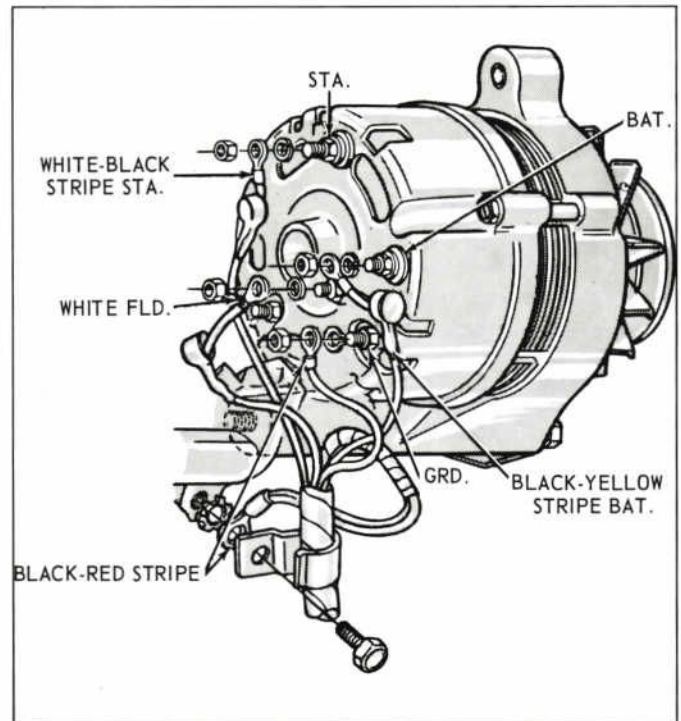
TERMINAL CONNECTIONS (1964-66 ALTERNATOR)
